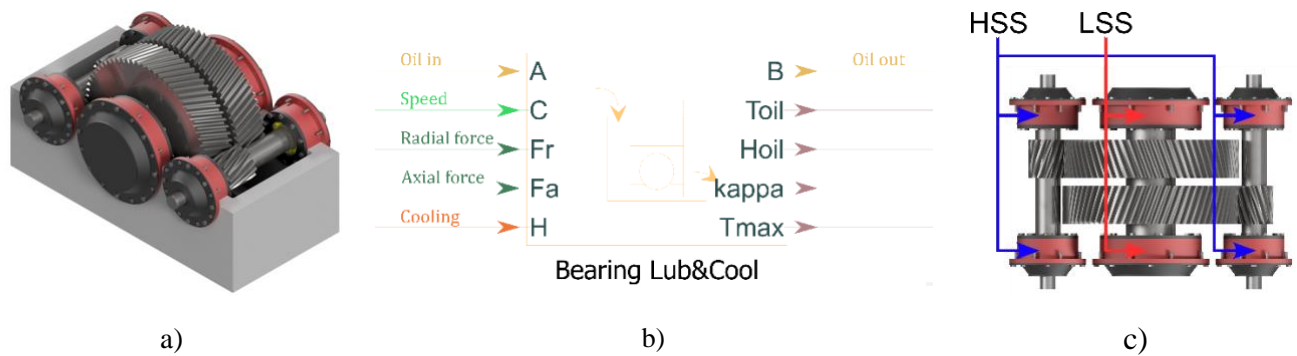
Gearbox setup a) CAD rendering of the selected gearbox design, b) custom Simscape bearing block, c) hydraulic connection schematic (HSS = high speed shaft, LSS = low speed shaft).
